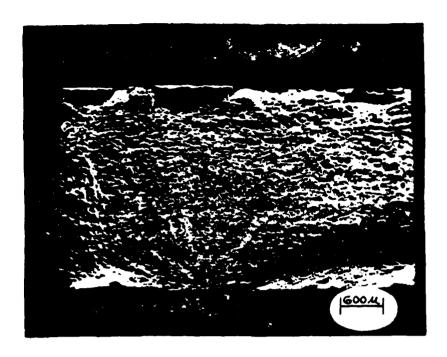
Fracture surface. Smooth specimen (air #16).  $\sigma_i = 17,768$  psi. Note fatigue origin on specimen (lower edge middle) with diverging river marks. 20%.
